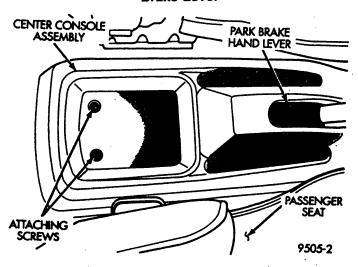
Attaching Screws At Rear Of Center Console W/O Arm Rest
